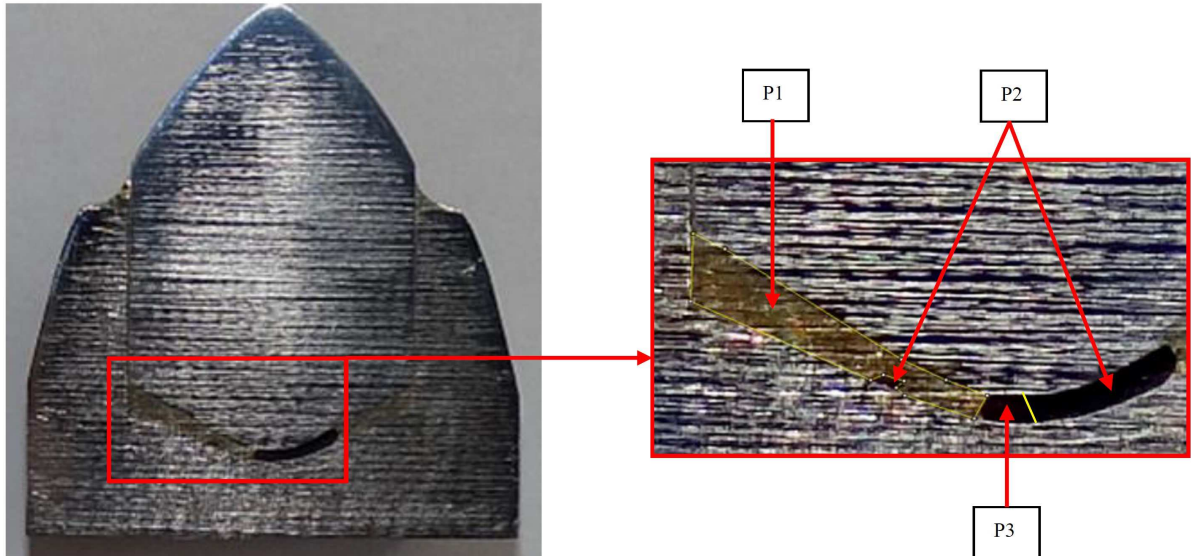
Sample cross-section of roadheader's cutting tool used for determination of the degree of filling the solder gap symbols: P1 – solder, P2 – lack of solder, P3 – technological void
